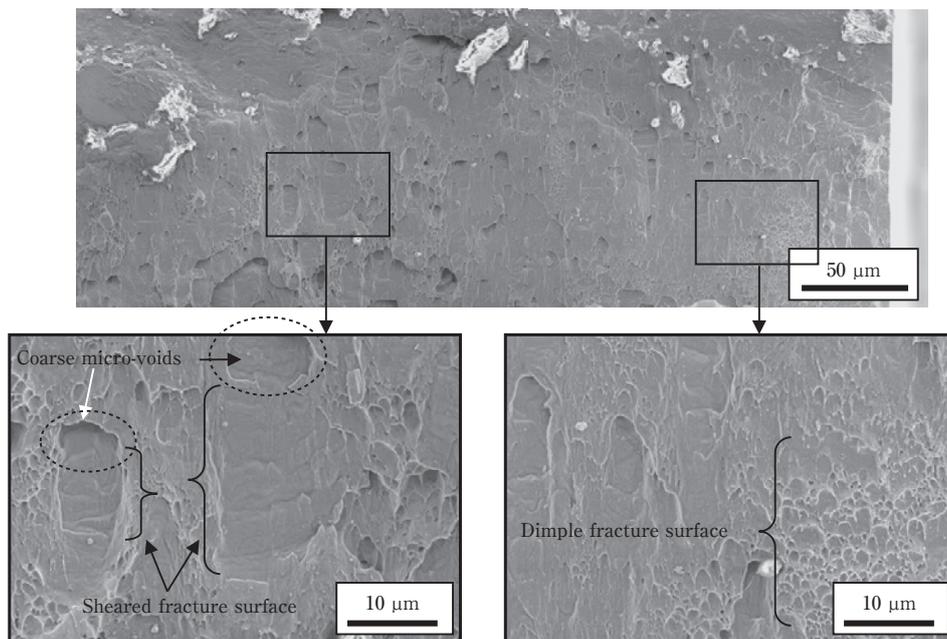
Fracture surface morphology at the fracture area.
